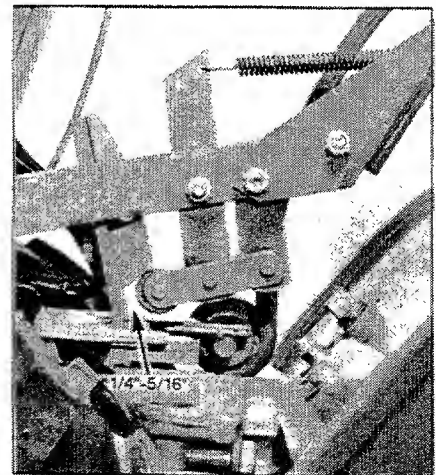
Shift into FORWARD and measure distance between roller and upright bracket using the belt adjustment tool.
